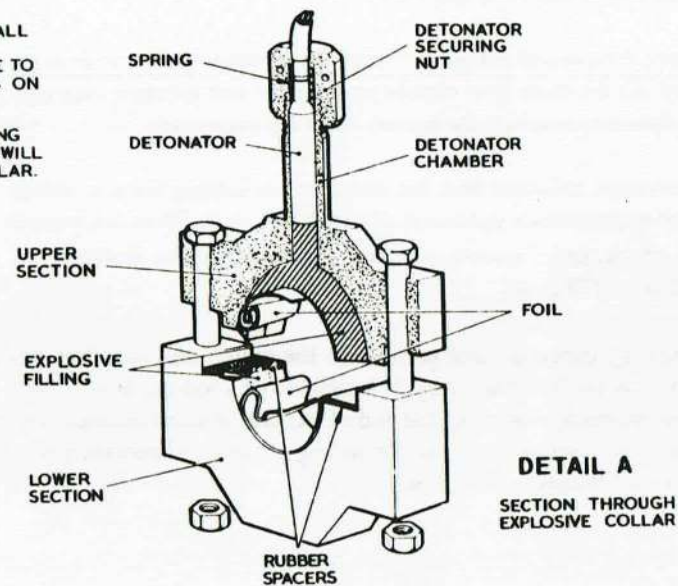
ELEVATOR CONTROL ROD SEVERANCE UNIT ASSEMBLY
